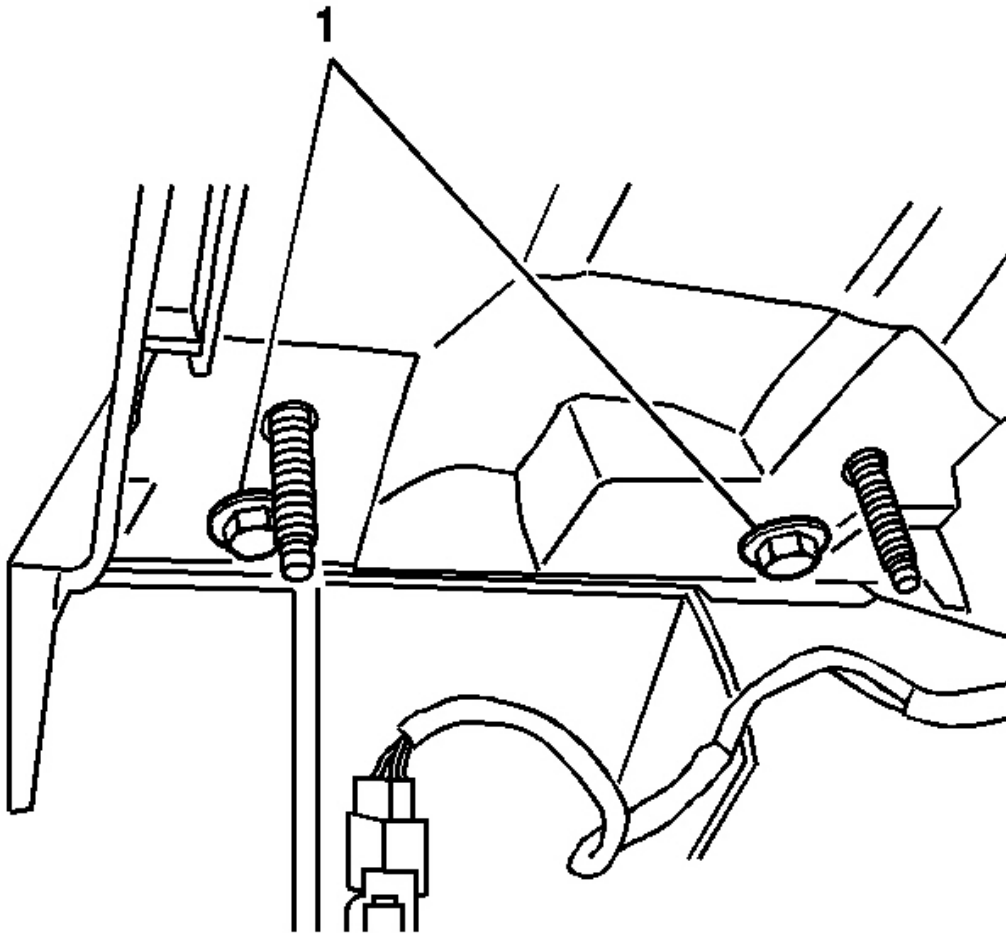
Locating IP Wiring Harness To IP Support Brackets Retaining Screws
